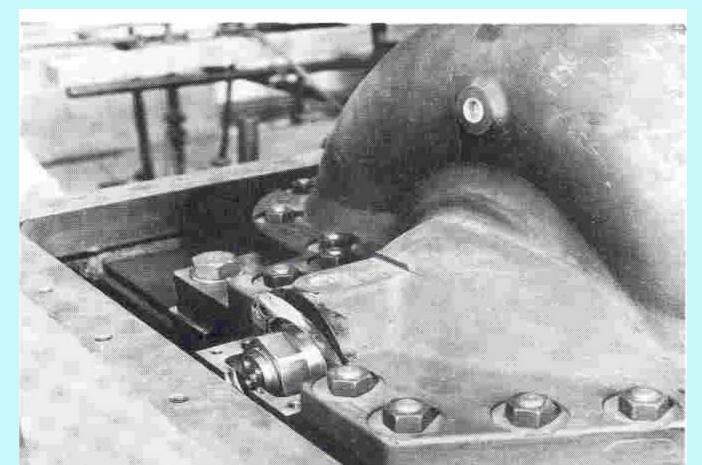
Main Oil Pump in Front Bearing Pedestal
